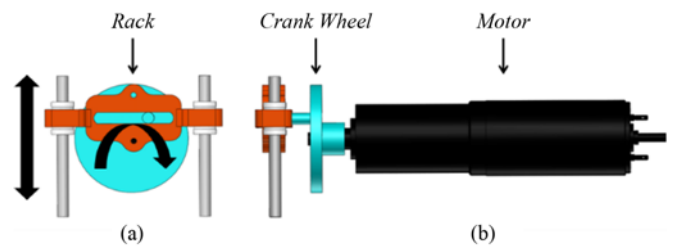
Overall design of the Scotch yoke mechanism; (a) front view, (b) side view
